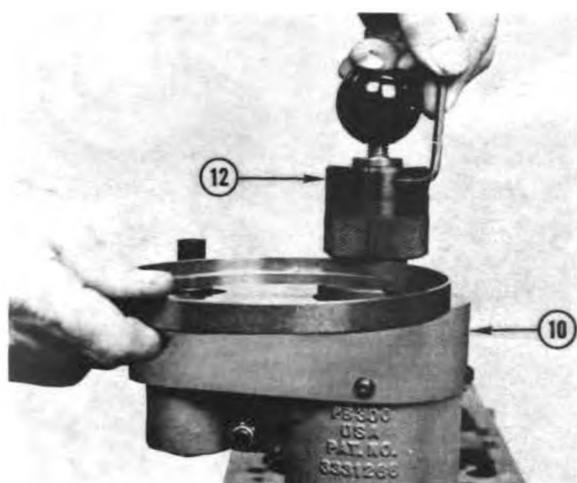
Adjust The Cutting Travel Of The Tool.
